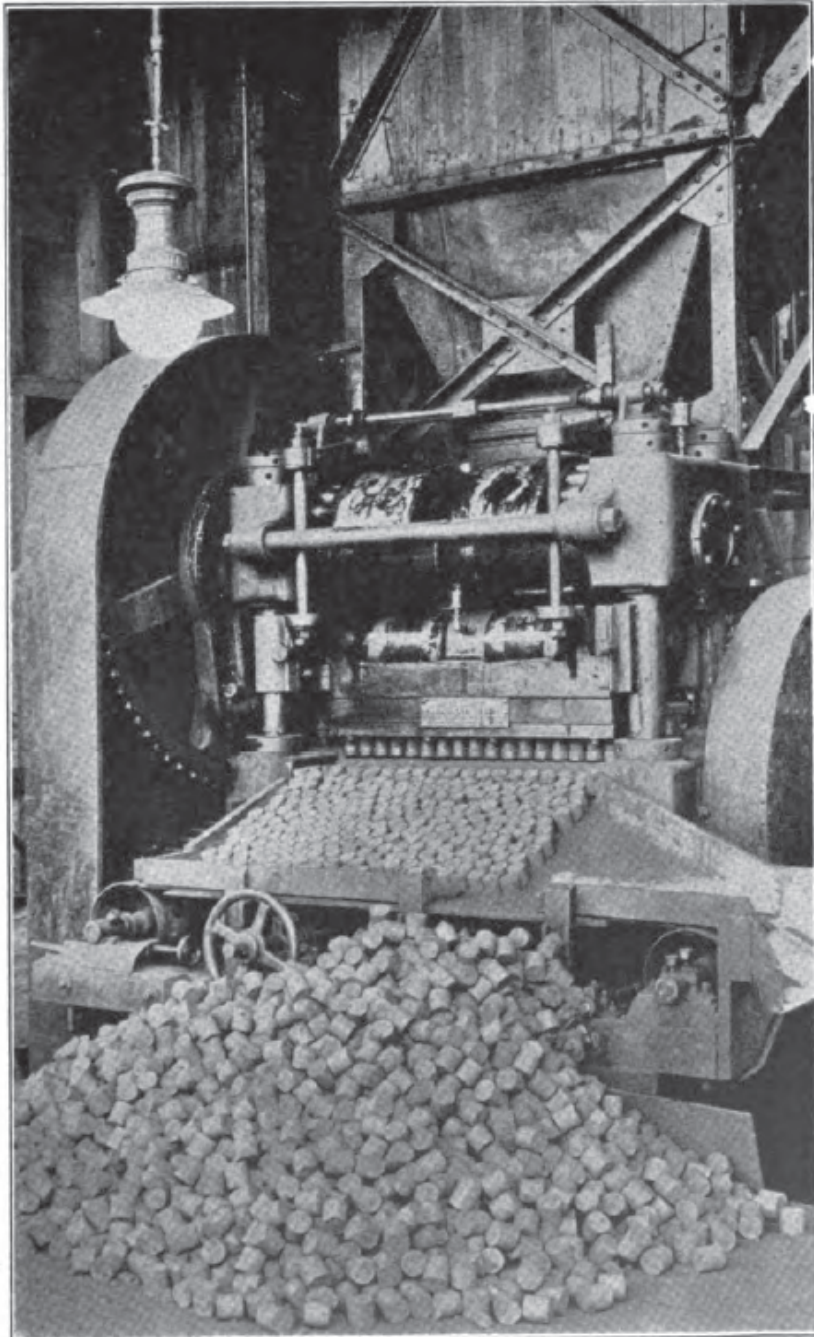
Picture of the Briquette Plant at New Gas Plant at
